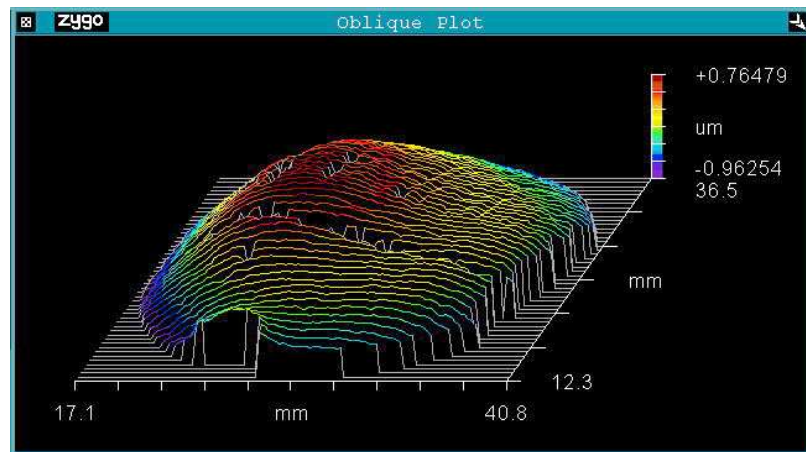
Interferometer flatness measurement of a 25mm diameter air bearing porous surface
